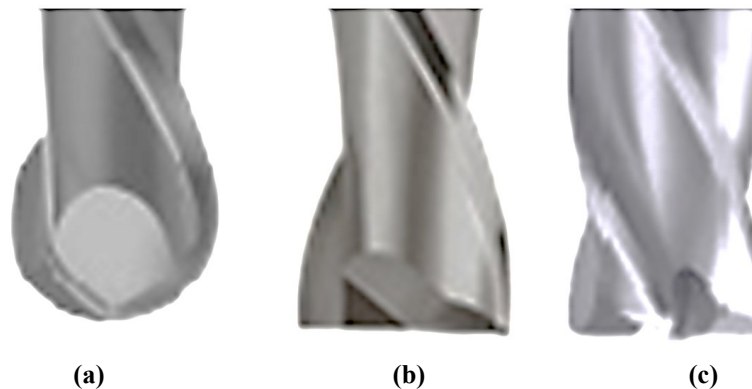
Geometry of a tool used for surface machining: (a) ball nosed end mill, (b) flat end mill, and (c) a radiused end milling cutters.
